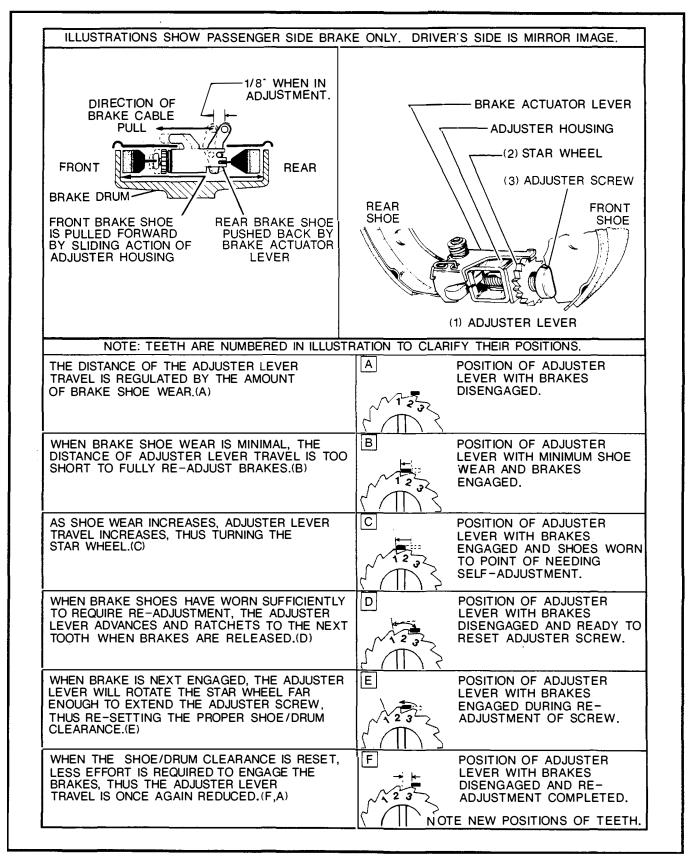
HOW THE BRAKE ADJUSTER WORKS
